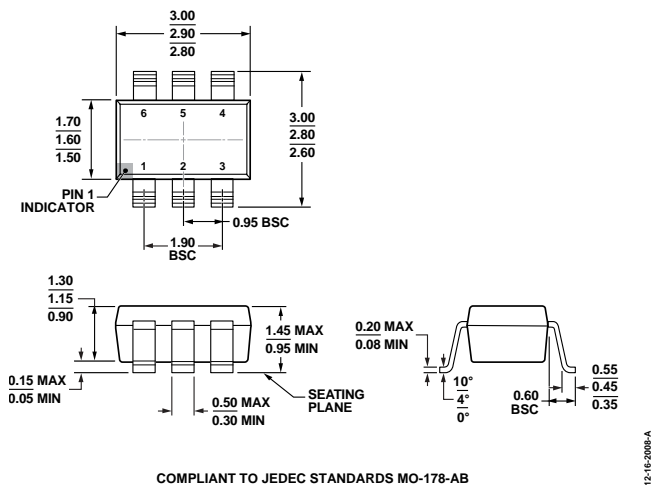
6-Lead Small Outline Transistor Package [SOT-23]
